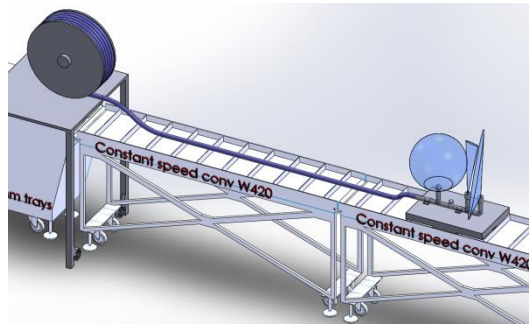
Schematic drawing of concept flexible cleaning device on conveyor belt
